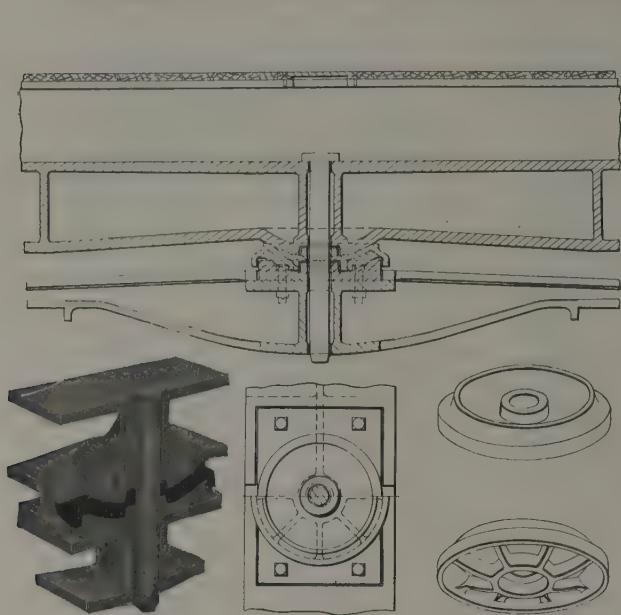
Miner Center Plate Shim as Applied to Passenger Equipment with Six-Wheel Trucks. W. H. Miner.
